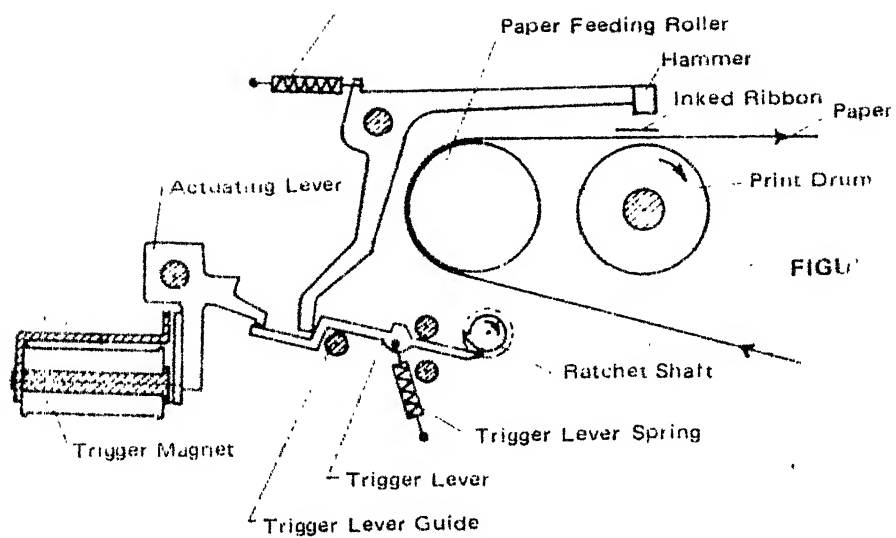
SEIKO AN -101F Printing Mechanism
